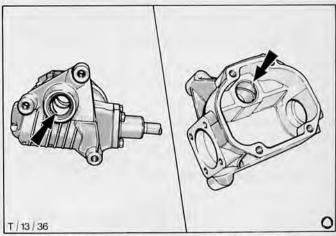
Ensure that open end of oil grove is open to the inside of the steering gear housing.
